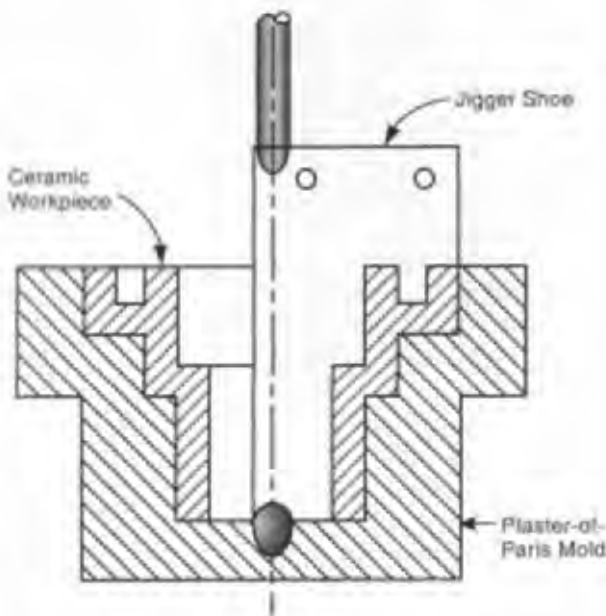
B9 Jiggering. The jigger shoe is rotated about the central axis to form the internal shape of the workpiece.
